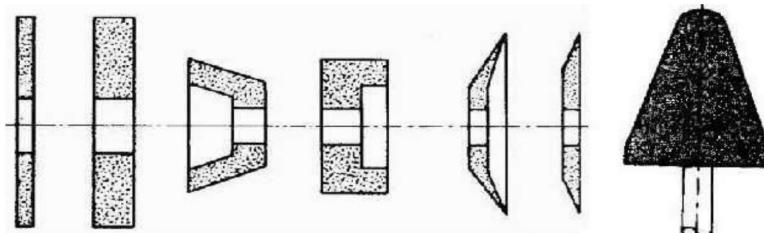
Standard wheel configuration for conventional grinding wheels
